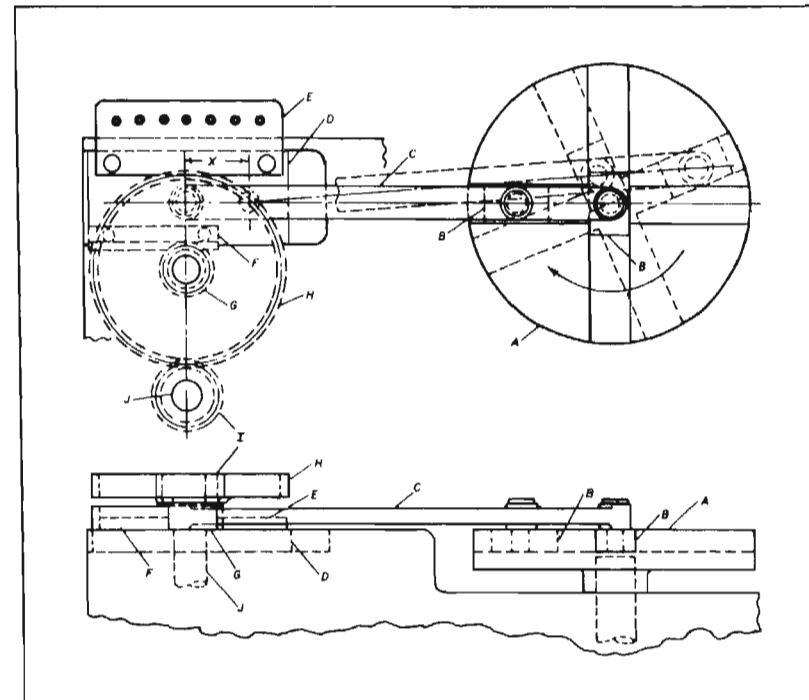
Mechanism that incorporates a trammel gear for effecting reciprocating and oscillating motions.
